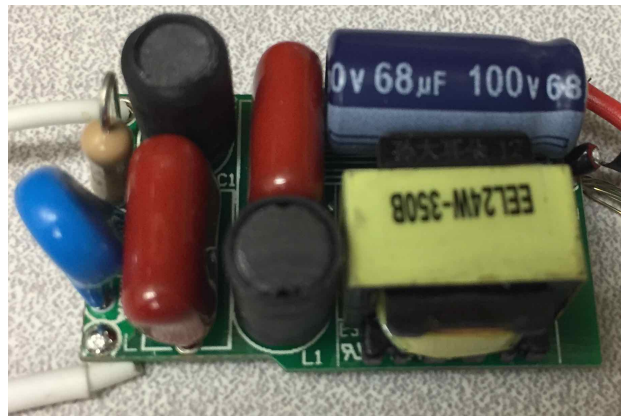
Original AC LED driver packaged in a PT-T84FP18W four-foot LED tube. The board dimensions are 3.5 x 2 cm.
